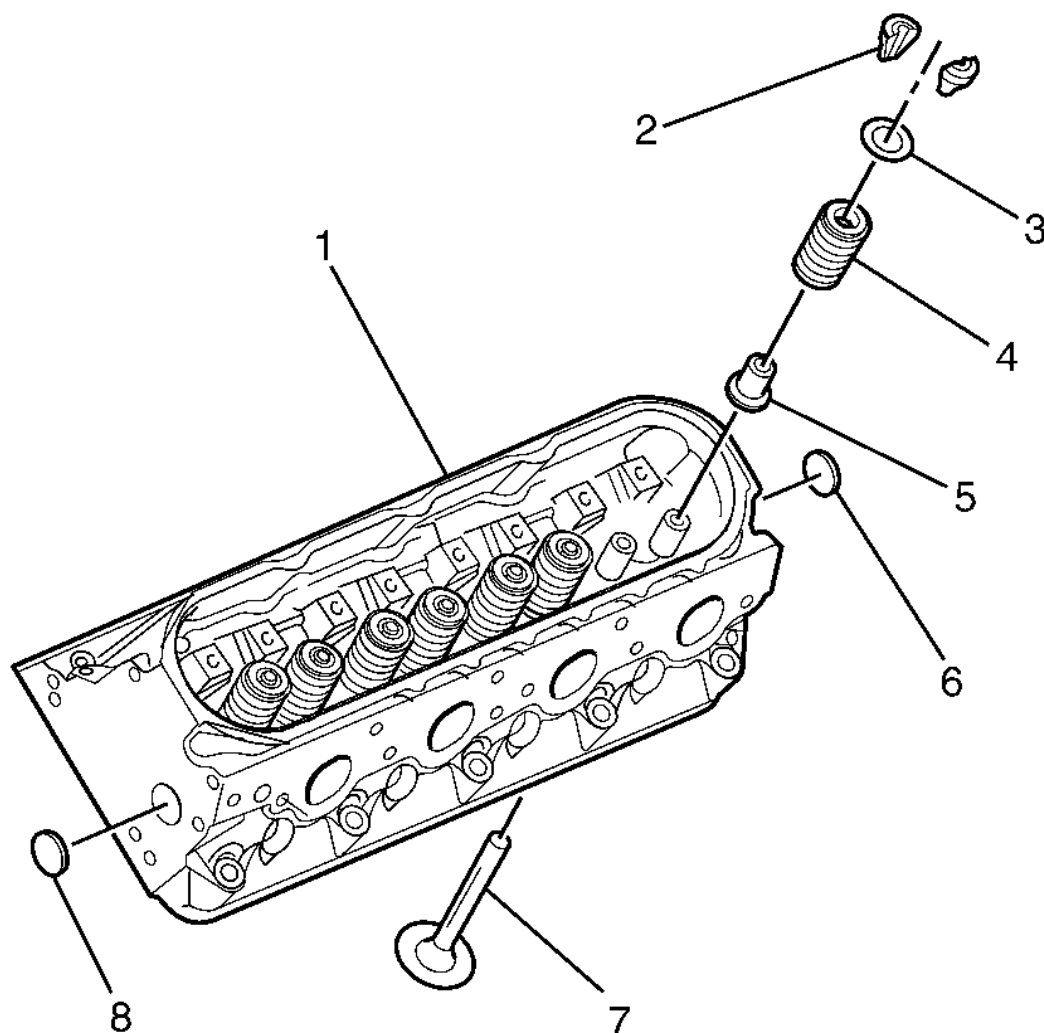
View Of Cylinder Head, Valve Stem Keys, Spring, Cap, Oil Seal & Coolant Core Plugs
